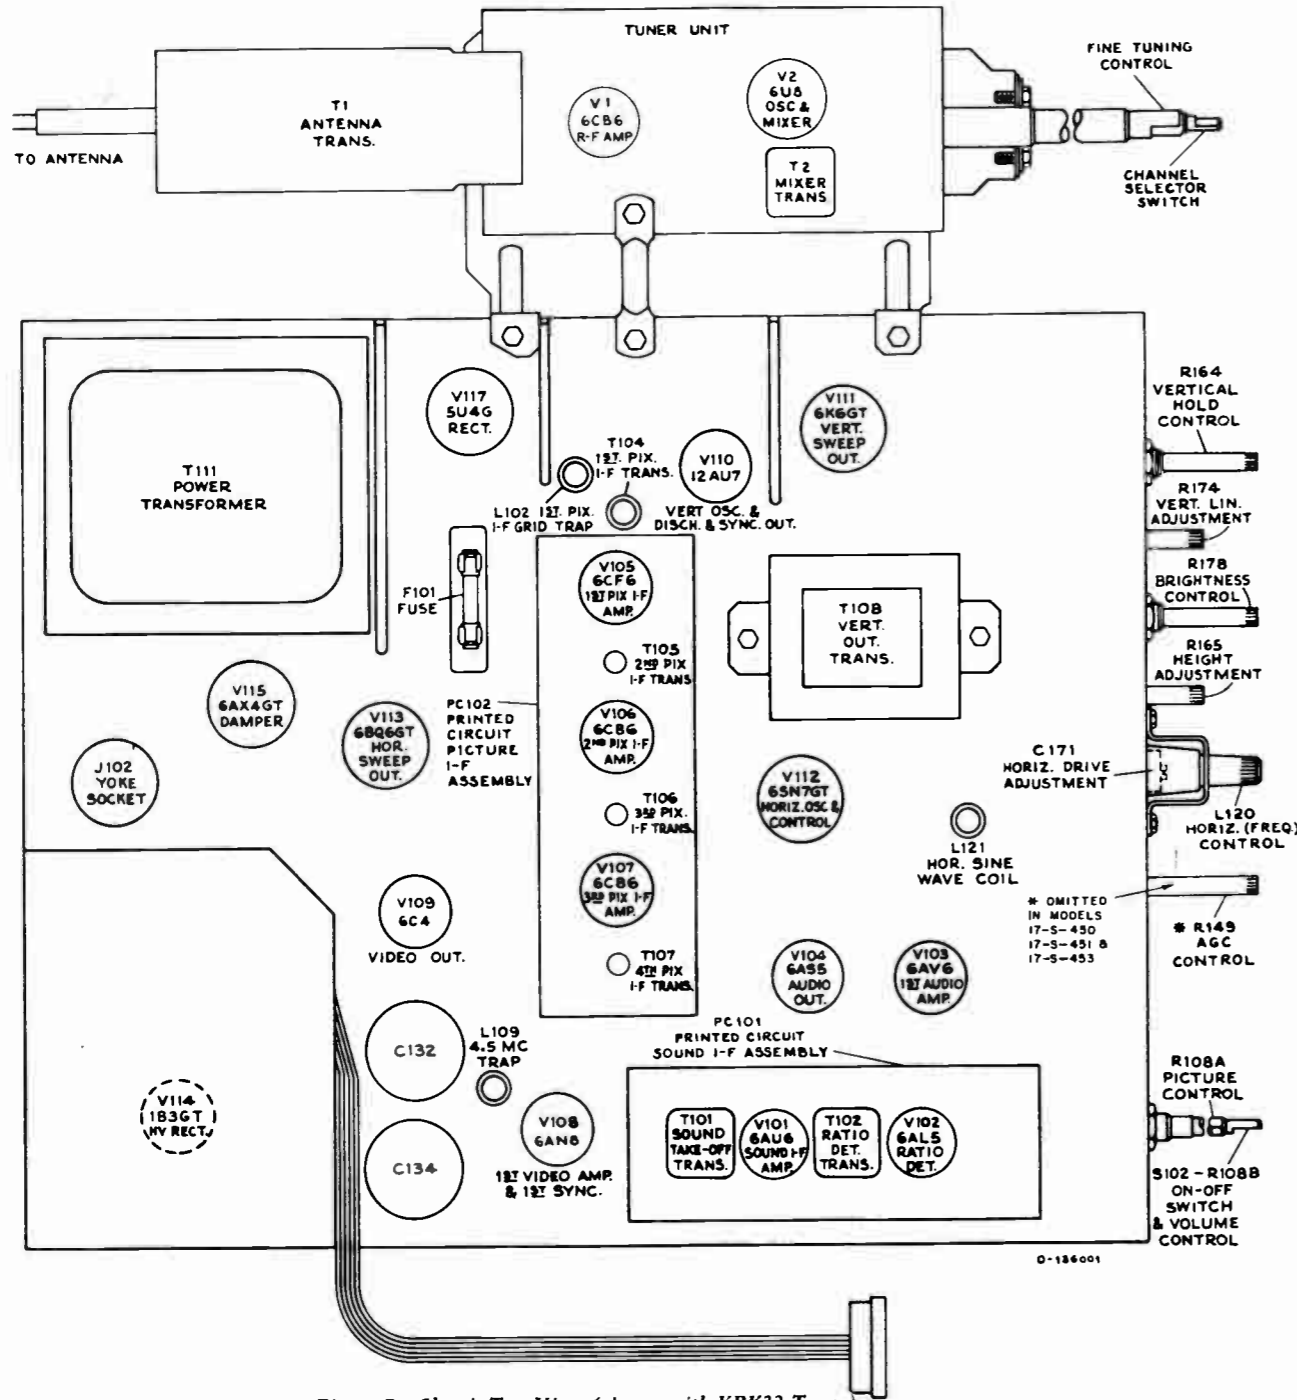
Chassis Top View (shown with KRK32 Tuner)
